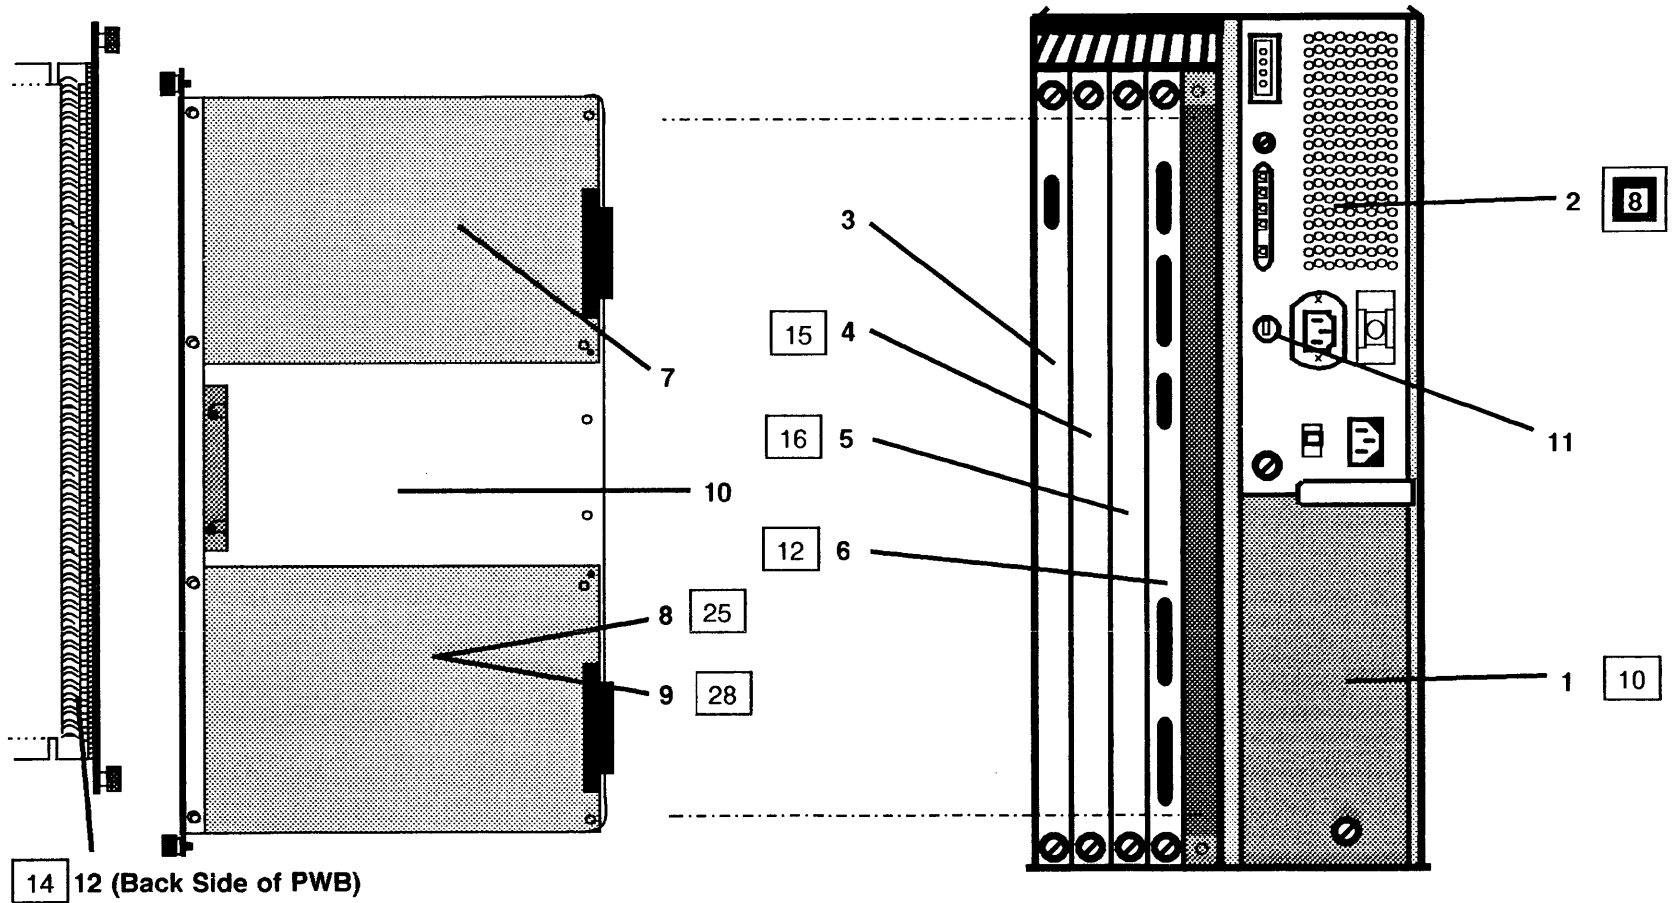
Processor Rigid Disk Drive, Power Supply and PWBs - Rear View
